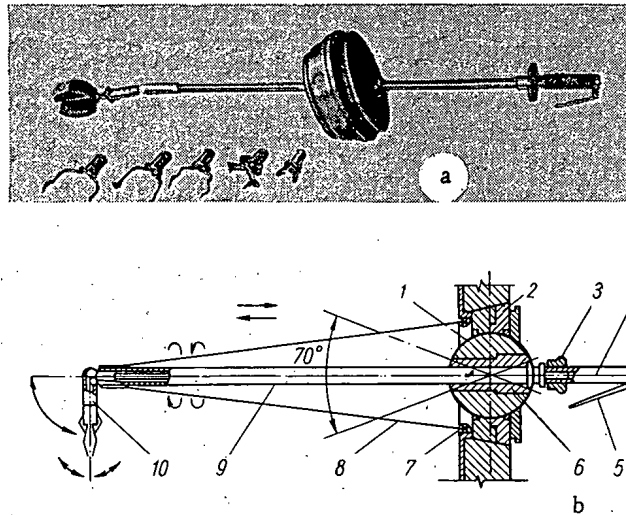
MSh-P-5 ball-and-swivel manipulator: a) General view; b) mechanical diagram. 1) Ball; 2) ball housing; 3) wheel for bending wrist; 4) control handle; 5) lever for opening clamp jaws; 6) adapter; 7) sheathing installation collar; 8) sheathing; 9) shaft support tube; 10) wrist unit.
